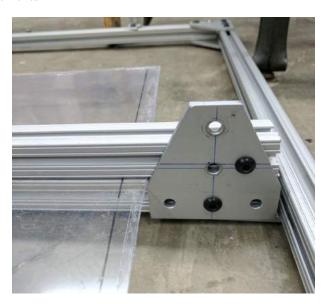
Plate joint. 1/16 inch above the center hole of the piece, another hole was drilled to hold the 80/20 piece 1/16 inch above the bottom to create the gap for sheets to slide into.
